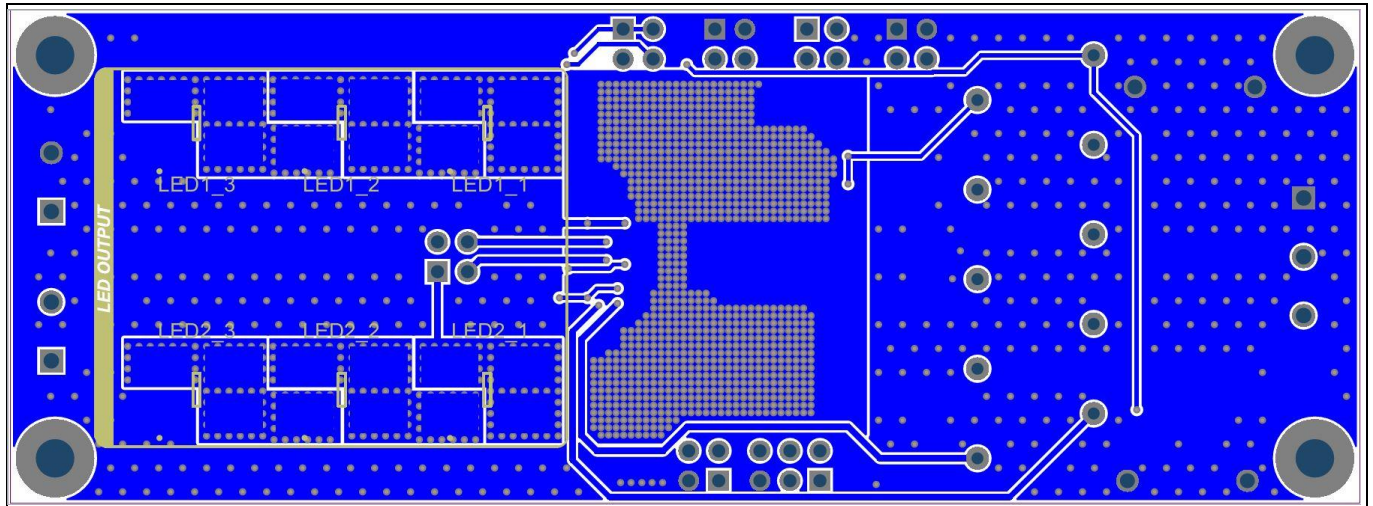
Layout of TLD2252-2_RCL_EVAL board - bottom layer
